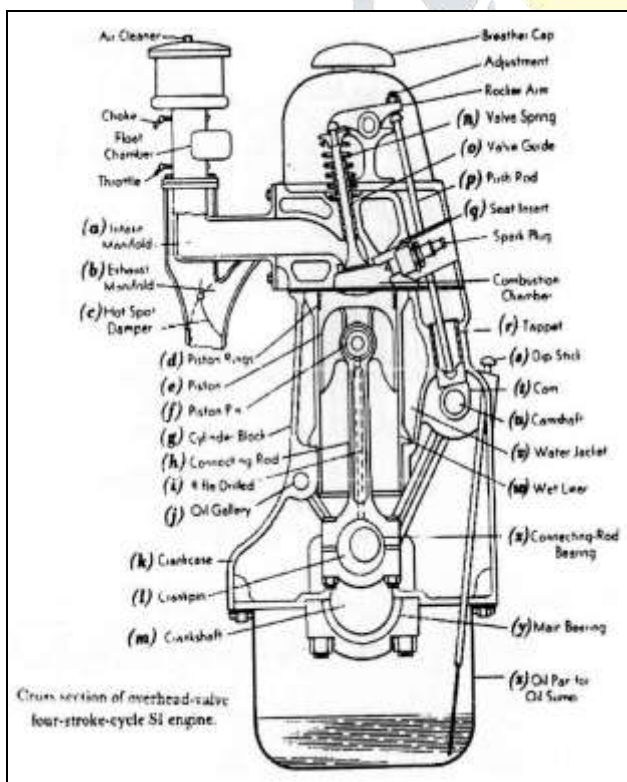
Component details of Spark Ignition Engine (Pulkrabek, 2013; Willard, 1997).
